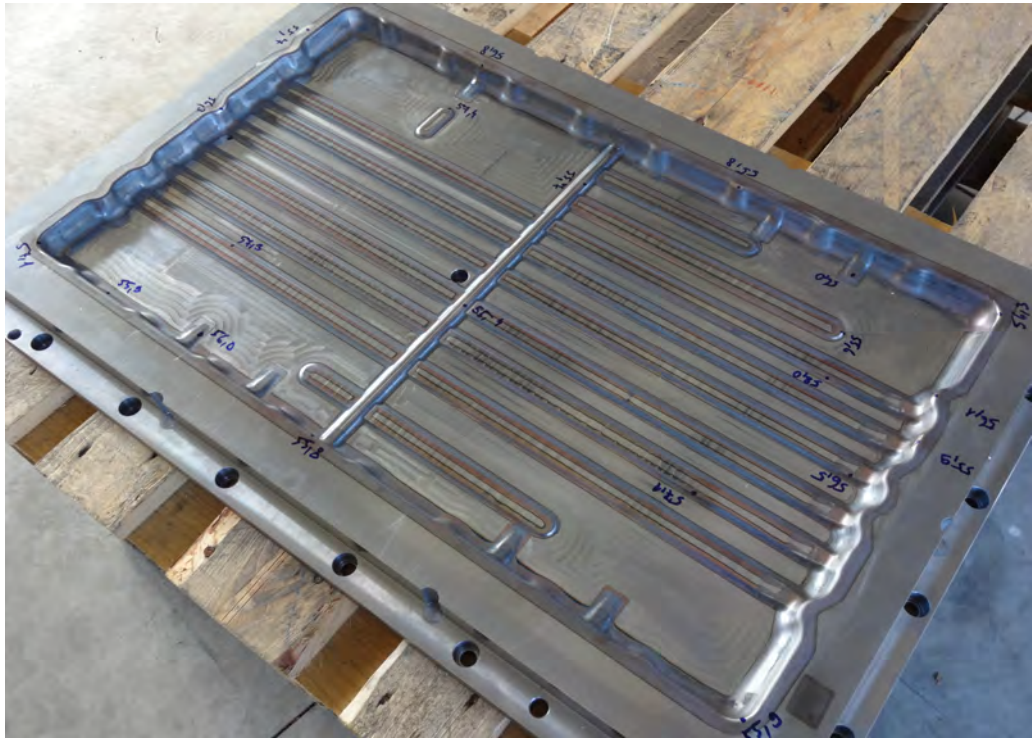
Deep drawing tool, automotive industry. Source: [5]
